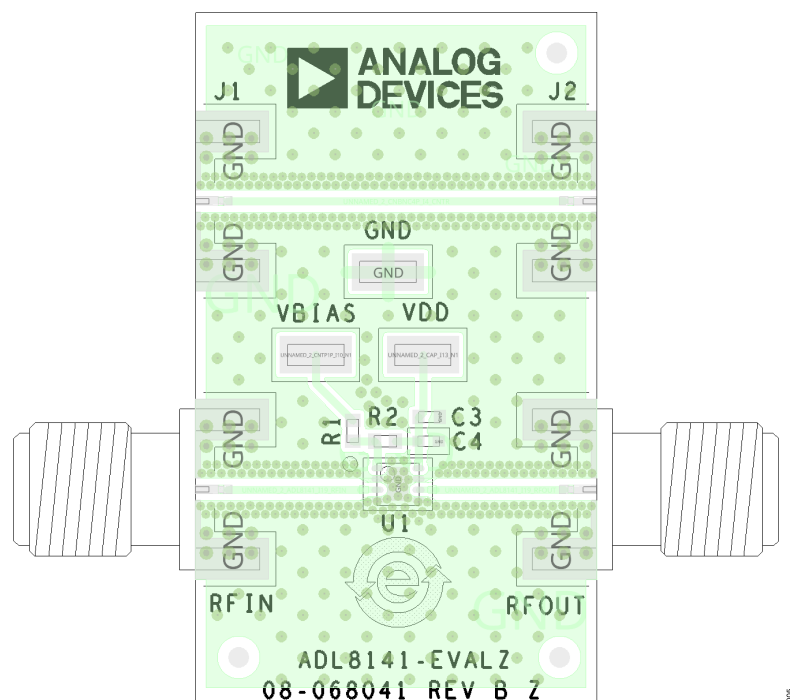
ADL8141-EVALZ Assembly Drawing (J1 and J2 Not Installed)
